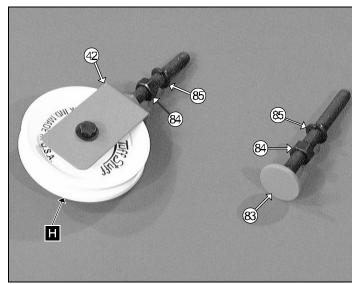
Assemble the Adjustable Pulley Bracket (#42) using on Nylon Pulley 4 1/2 Rd. (#26-Labeled H), one Hex Head Cap Screw 3/8-1 X 1 3/4 (#50), two Flat Washers SAE 3/8 (#45) and one Nylon Insert Jar Lock Nut 3/8-16 (#48). Next, thread a Regular Hex Nut 1/2-13 (#84) an insert one Split Washer B.O. 1/2 (#85) onto the welded Hex Tap Bolt. Next, locate the Adjustable Stopper (#83) then thread a Regular Hex Nu 1/2-13 (#84) and insert one Split Washer B.O. 1/2 (#85) onto the welde Hex Tap Bolt.
